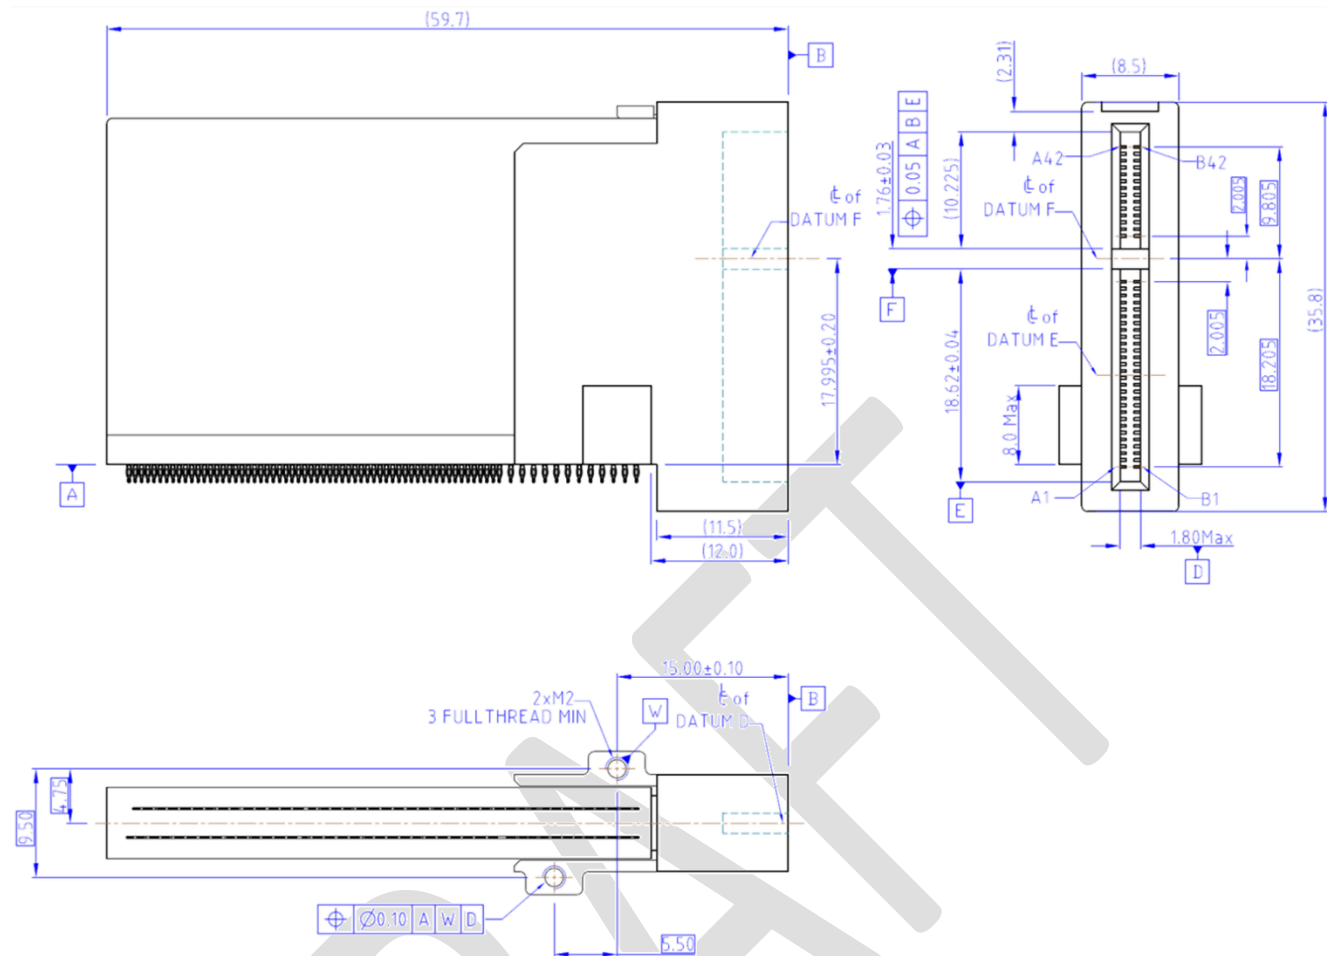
2C RIGHT ANGLE ORTHOGONAL CONNECTOR DIMENSIONS (MM)
